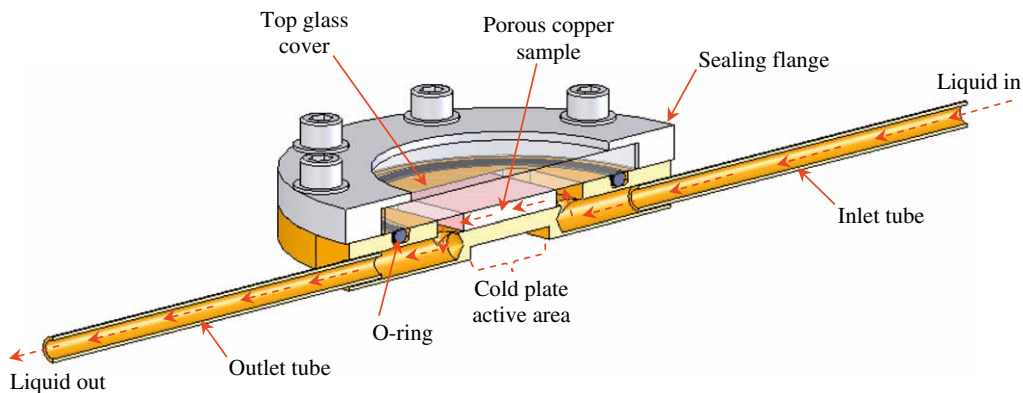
Cross sectional view of the sintered porous heat sink showing the liquid flow pattern inside the cooling section.
